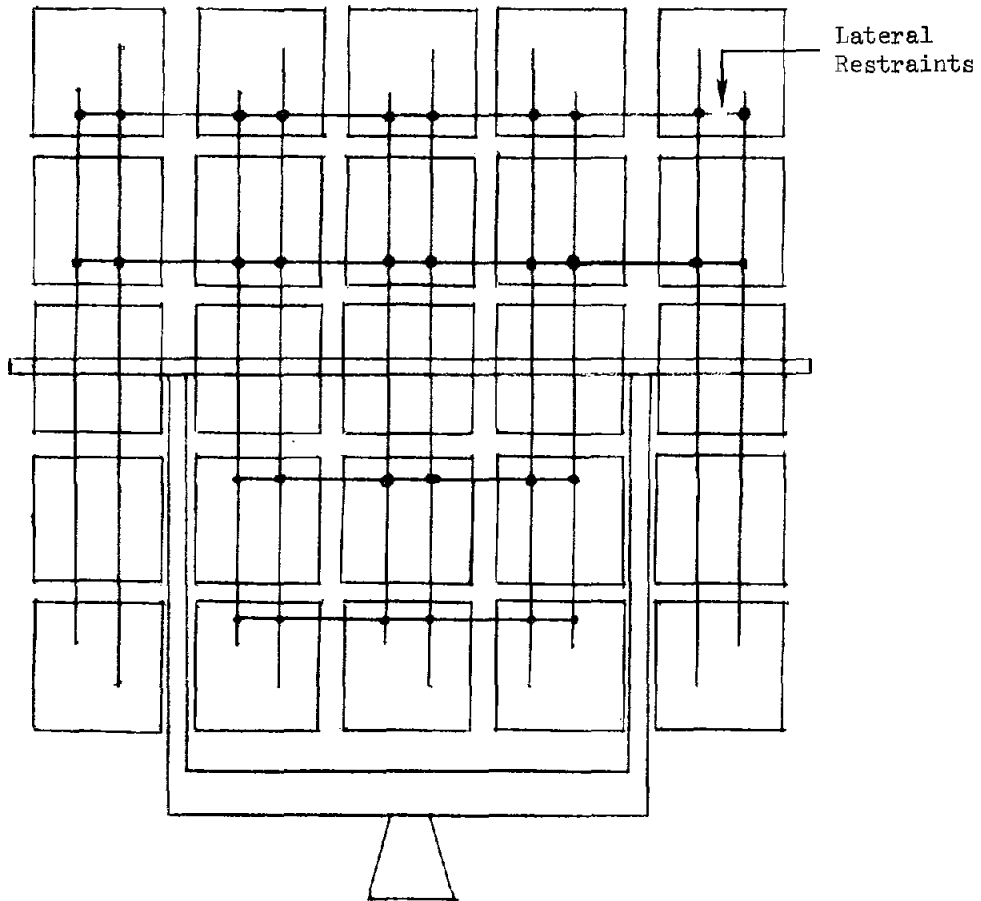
Possible Structural Modification to Heliostat Facet Assembly
